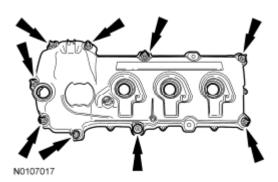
Locating RH Valve Cover Stud Bolts Courtesy of FORD MOTOR CO.
